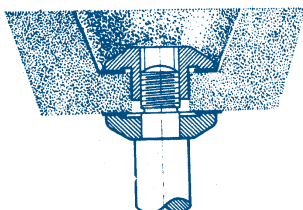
An adaptor flange for an unthreaded hole cup wheel. To provide proper support, the adaptor flange and back flange should be equal in outside diameter and diameter of recess.
